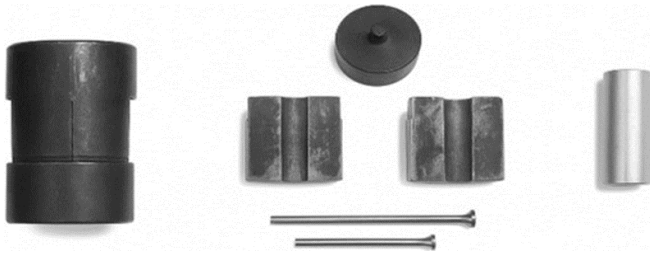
Components of the specimen preparation mold assembly used to produce standardized cylindrical amalgam specimens for mechanical testing
